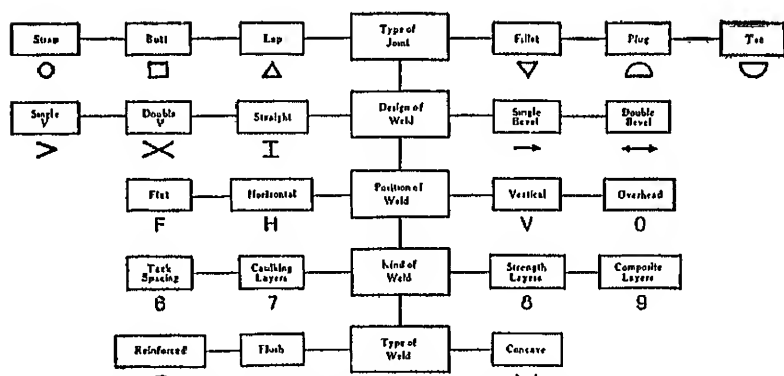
Standard Symbols Recommended by the Welding Committee of the Emergency Fleet Corporation.
